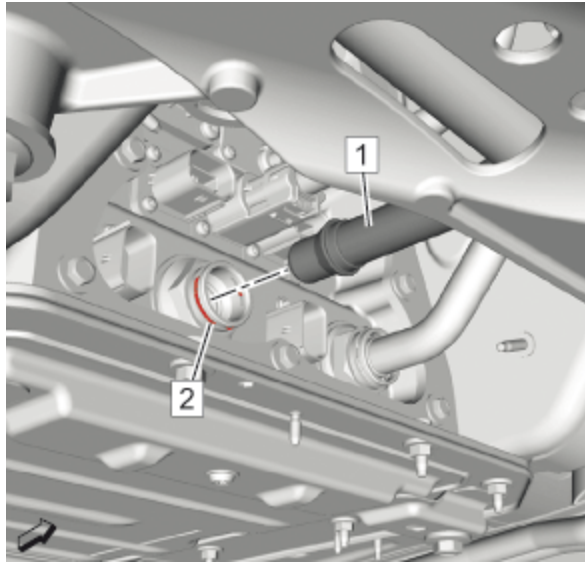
Retainer And Drive Motor Battery Coolant Inlet Hose
